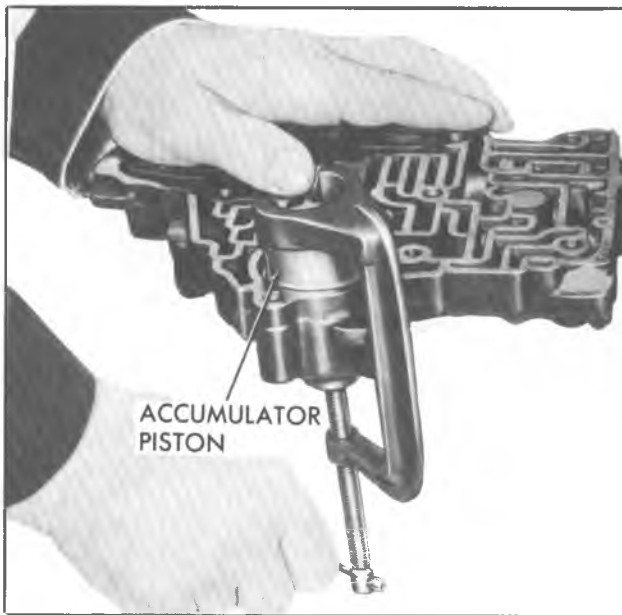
B--Installing Compressor Tool to Front Accumulator Piston
